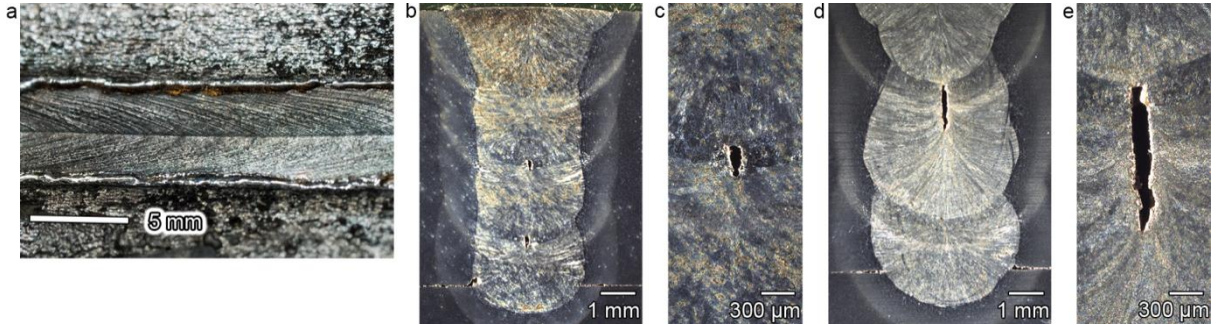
Macrographs (a) Photograph of resulting weld surface; (b) Full weld including bottom to top pass; (c) Magnification of crack between 2nd and 3rd pass in sample in b; (d) Full weld sample that exhibited arcing with an average wire voltage of 19V; (e) Magnification of crack between 2nd and 3rd pass in sample shown in d.
